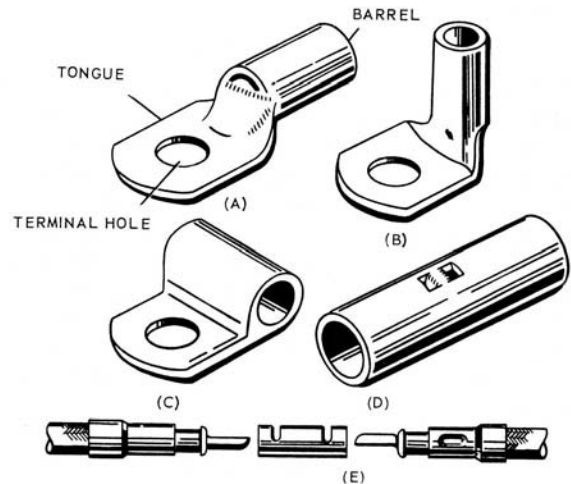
Basic types of solderless terminals: A. Straight type; B. Right angle type; C. Flag type; D. Splice type; E. Disconnect splice type.
